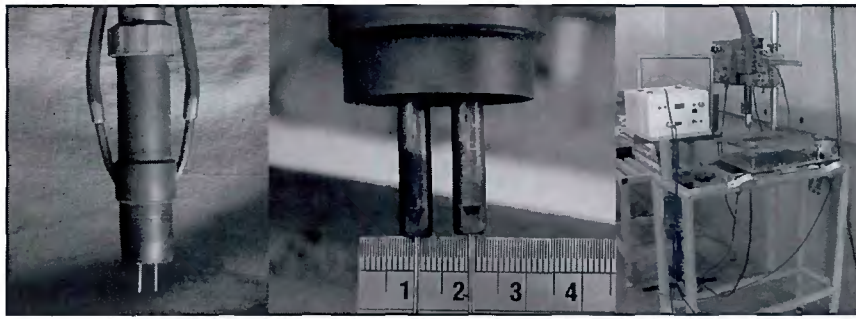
Illustration of the welding head and experimental rig.
